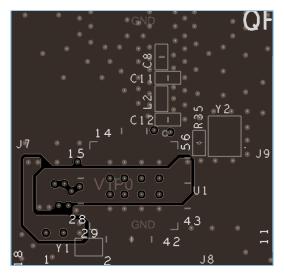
Layer 3 design for 4-layer PCB (QFN56)
